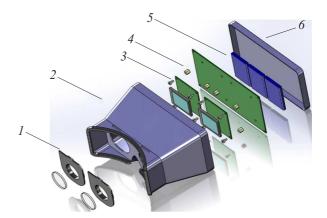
Testing device. 1 — Eyepiece, 2 — case, 3 — display, 4 — driver, 5 — main board with a radio module, and 6 — back cover.
